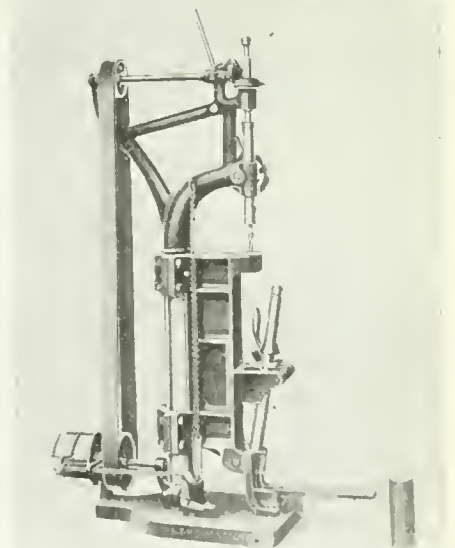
CENTERING MACHINE WITH TILTING, EXPANDING ARBOR.
